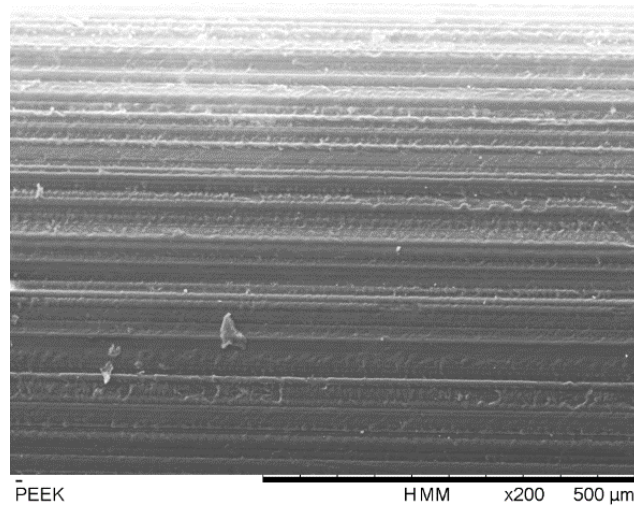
SEM image of unused PEEK O-rings showing a smooth surface with extrusion machining marks on the surface
